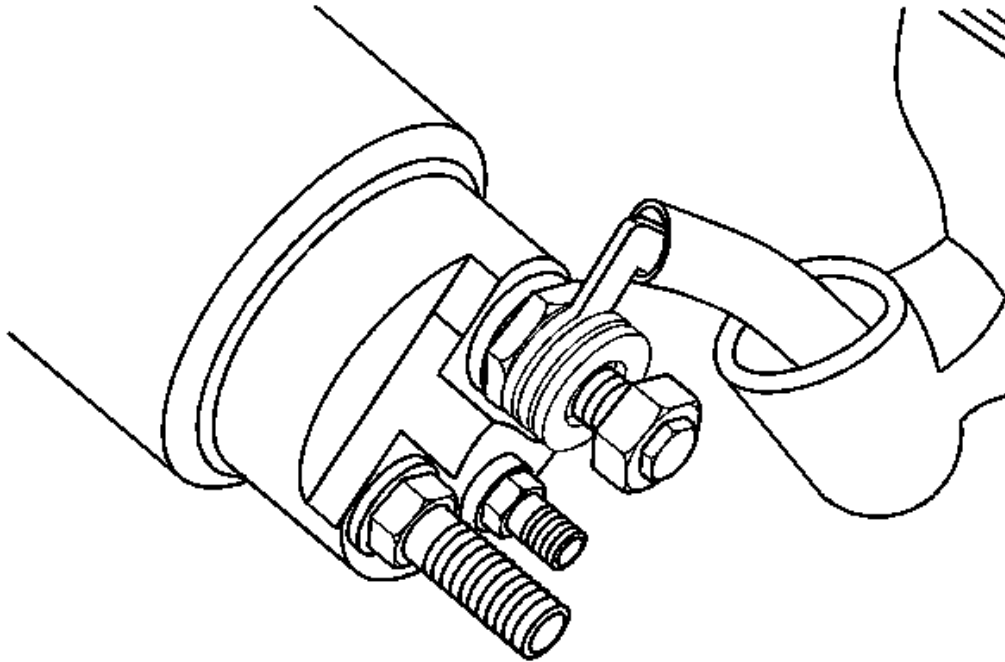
View Of M-Terminal Stud, Nut & Cable (6.6L (LB7) Engine)
